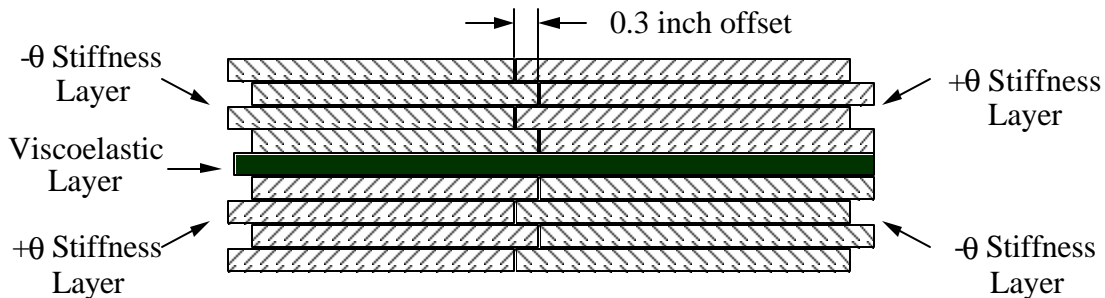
Side View of Plate and Beam Segment Stacking Detail.
